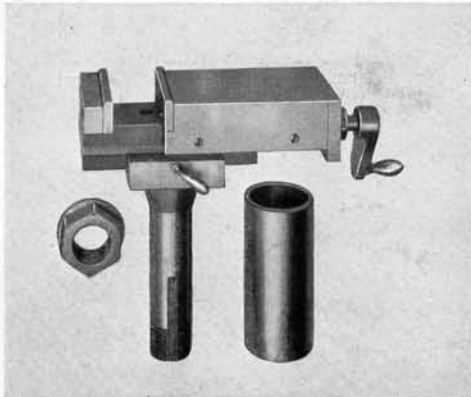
Vise. Shank mounts directly in head-stock spindle and slide rest milling attachment quill. With sleeve, shown in foreground, mounts in eccentric tool holder of compound slide rest. Jaws, hardened steel, opening 1½"
